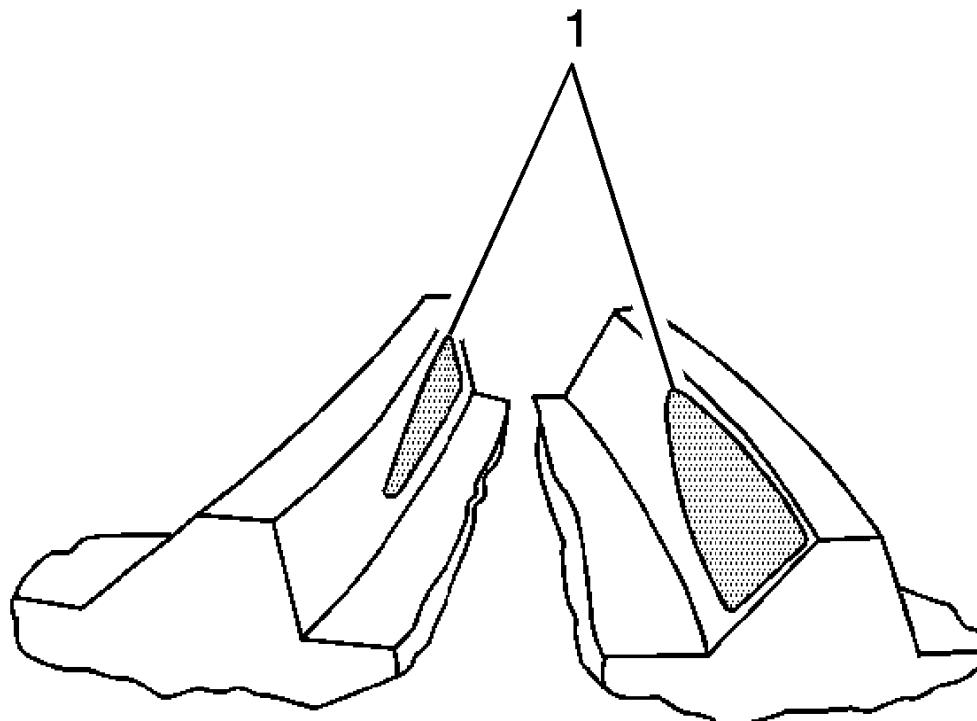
Identifying Drive Side Toe - Coast Side Heel Contact Pattern
